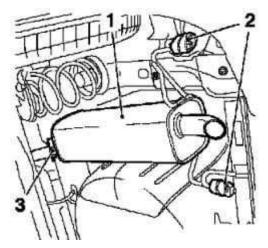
Removing the terminal silencing: 1 - endpoint silencer, 2 - rubber bearing 3 - clamp mounting
